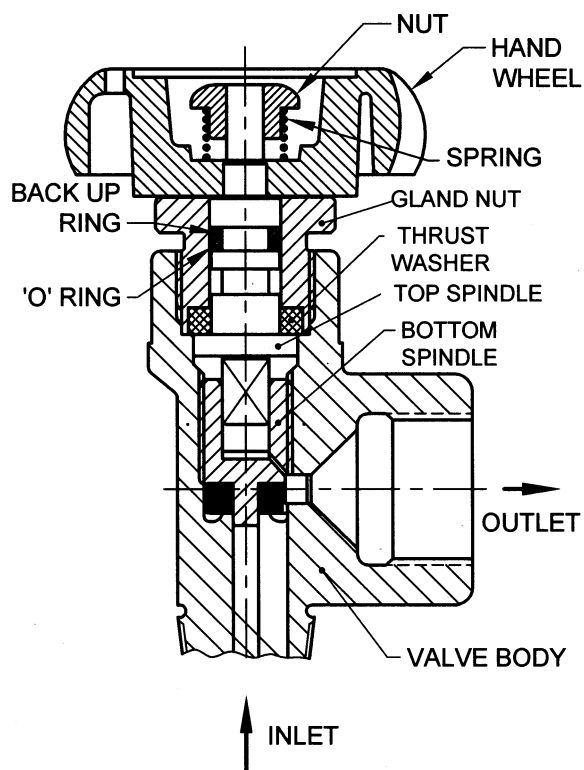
ILLUSTRATION OF PRESSURE SEAL VALVE,
